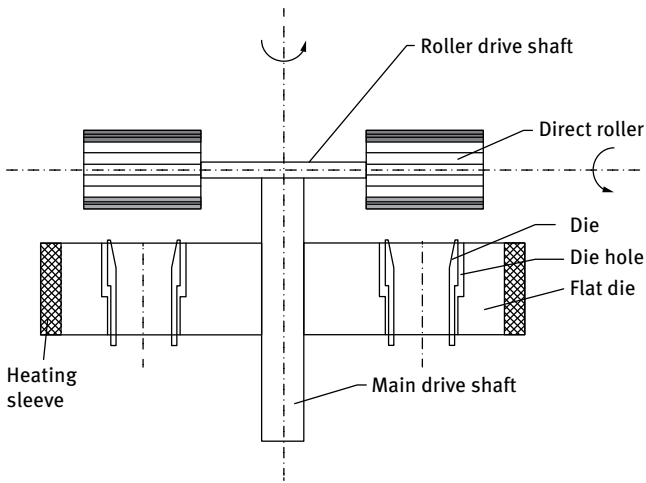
Schematic representation of direct roller type briquetting machine.
